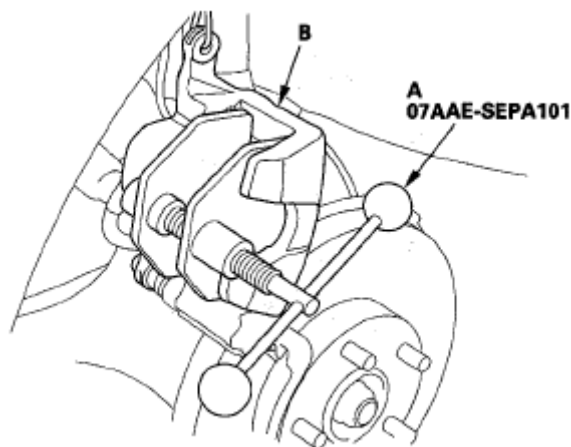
Identifying Brake Caliper Piston Compressor On Caliper Body
